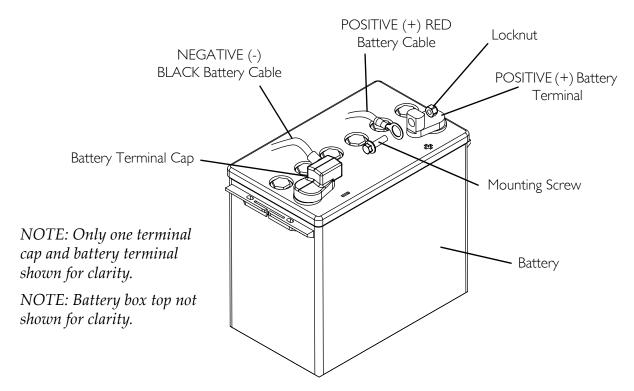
Disconnecting/Connecting Battery Cables
